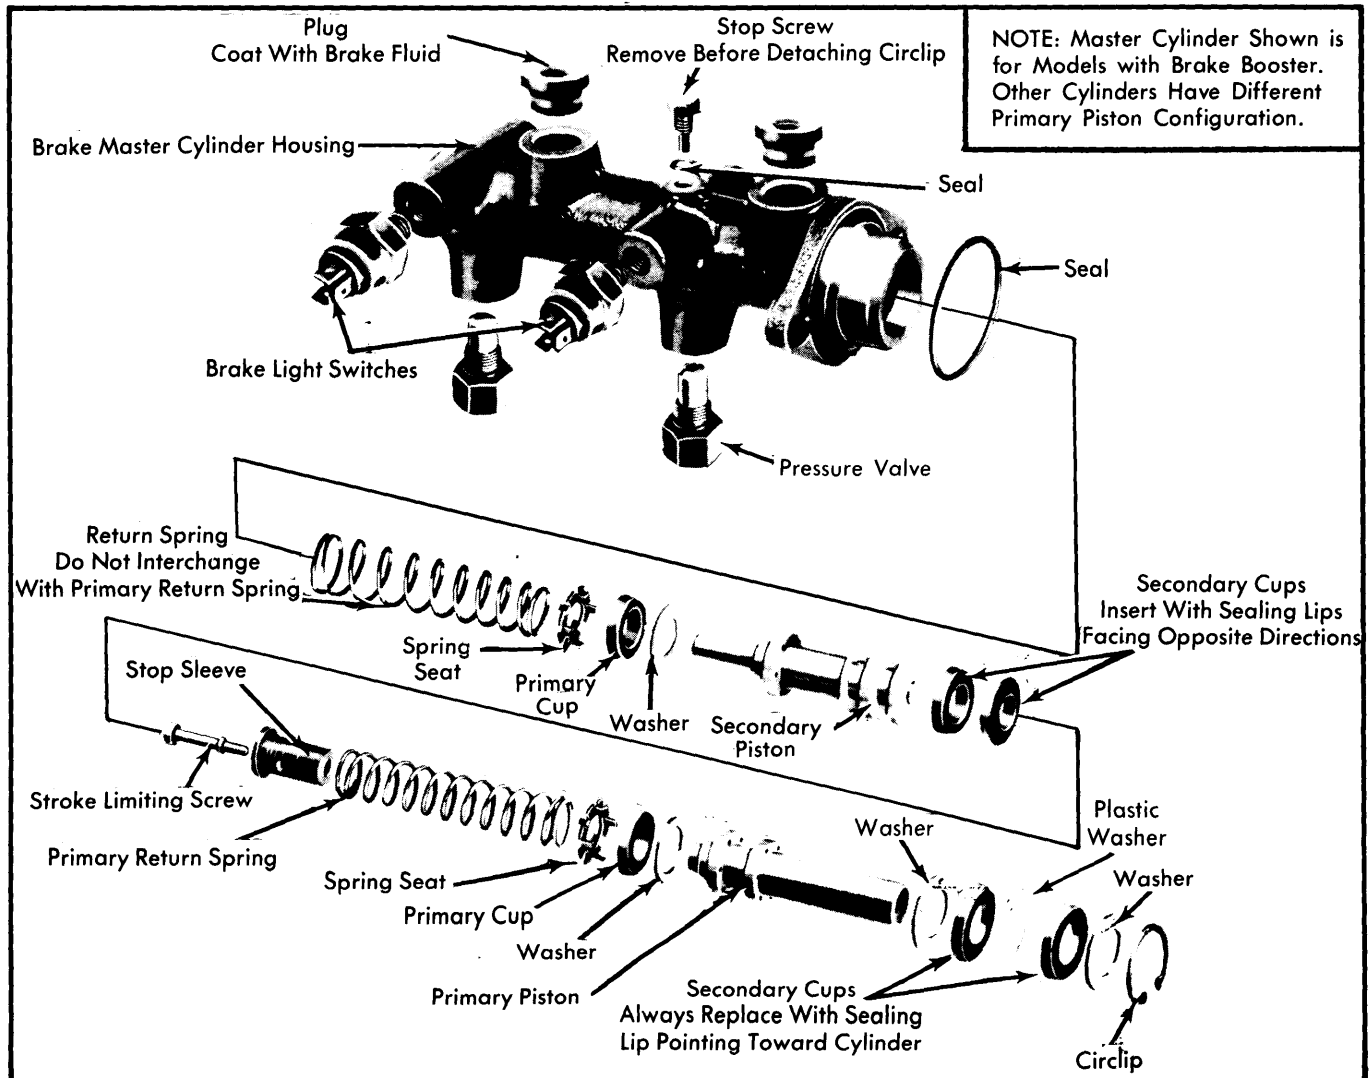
Master Cylinder Component Relationship — Rabbit, Scirocco, Dasher Shown
